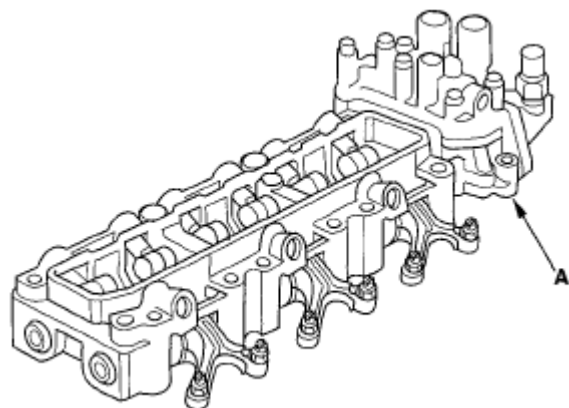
Identifying Rear Rocker Arm Oil Control Valve
